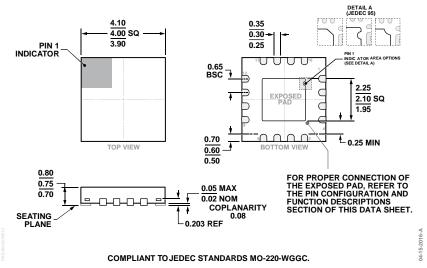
16-Lead Lead Frame Chip Scale Package [LFCSP] 4 mm × 4 mm Body and 0.75 mm Package Height (CP-16-23) Dimensions shown in millimeters
